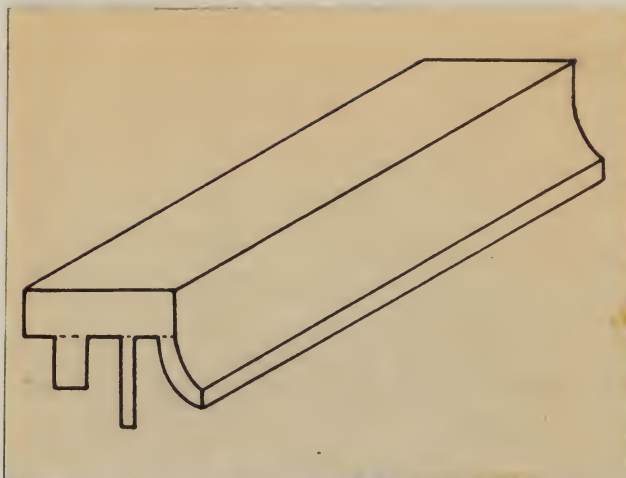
Method Of Breaking Cross Section Into Regular Components
